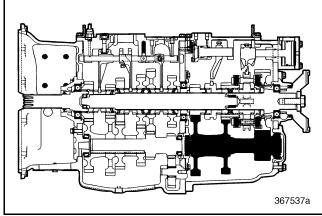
Rear Countershaft Locator (T313L/T318L Shown)
